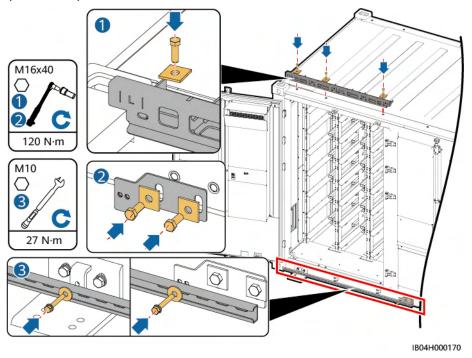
Installing the long top beam and the long bottom beam (scenario 2)
